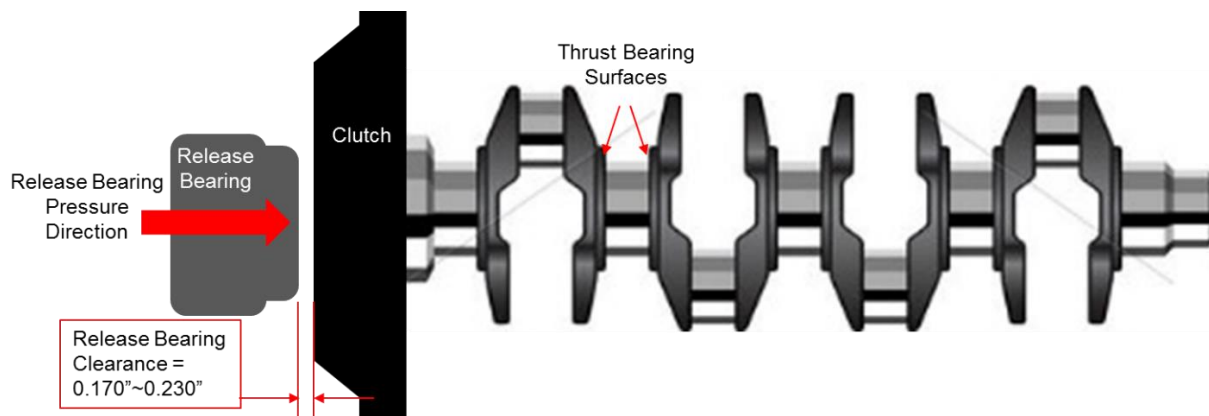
Crankshaft, Clutch, and Release Bearing Layout
